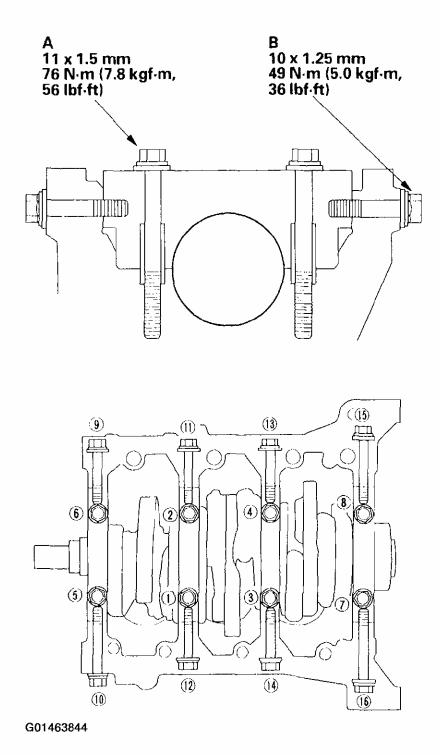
Tightening The Bearing Cap Bolts & The Bearing Cap Side Bolts In Sequence
